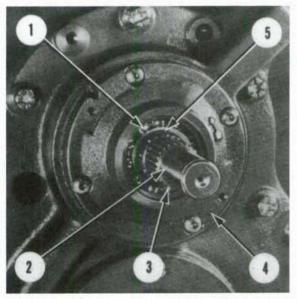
Low pressure hydraulic pump is mounted on rear of transmission housing.
